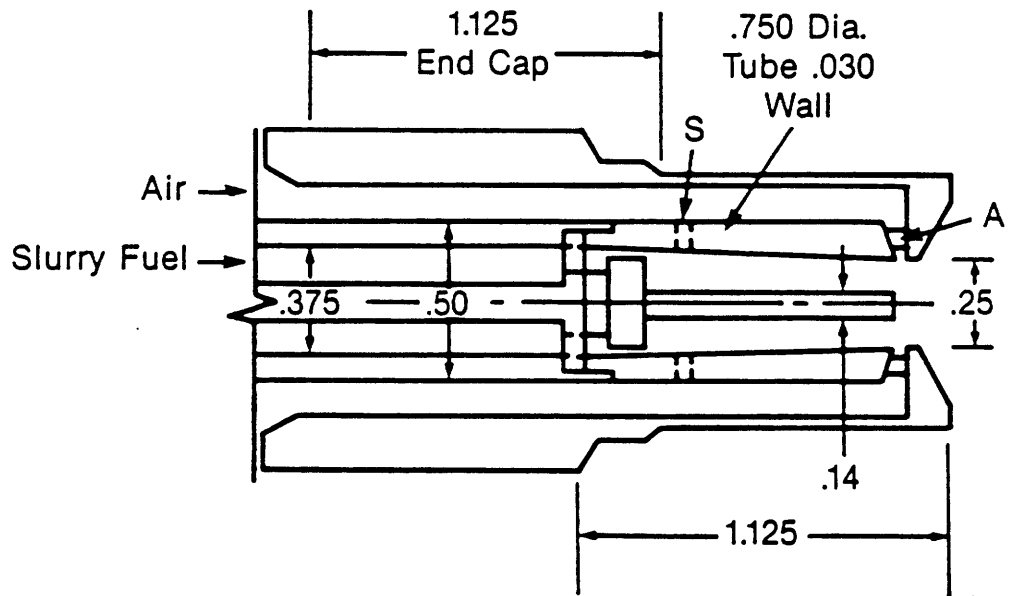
(b) Schematic of GE Nozzle Geometry, Dimensions in inches, Center passage (0.14 in. dia.) for auxiliary fuel, Holes at 'S' pre-mix air with slurry, Vanes at 'A' provide swirl
